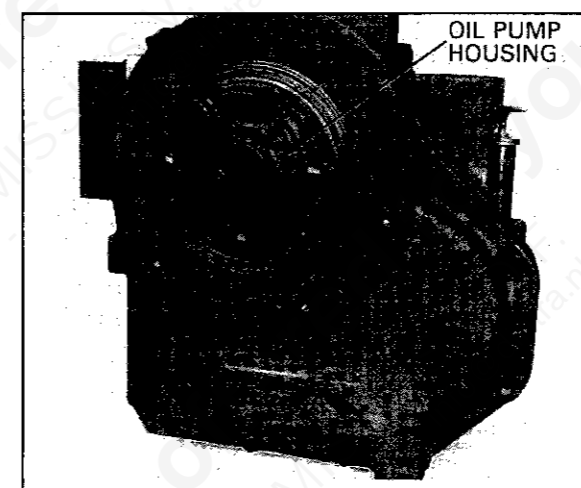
PUMP HOUSING BOLT INSTALLATION
